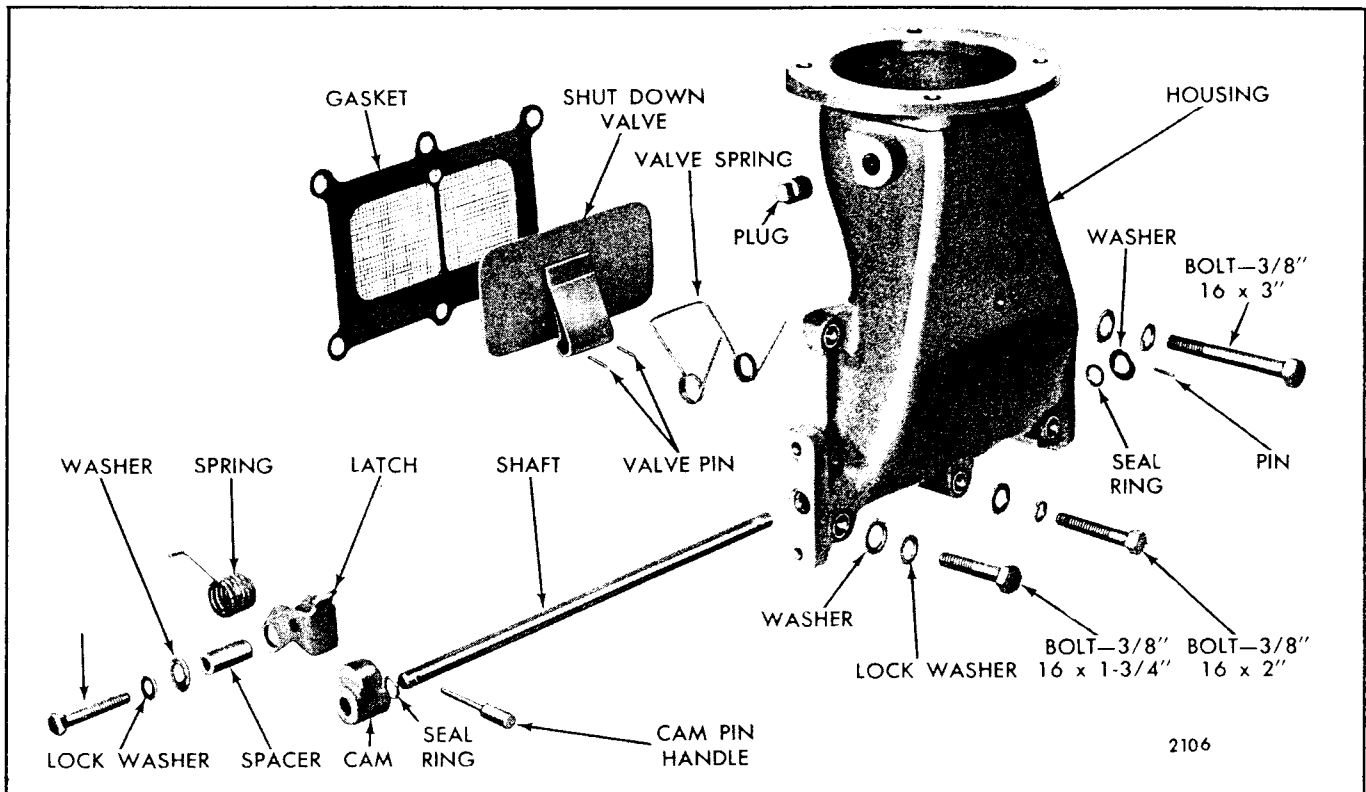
Typical In-Line Air Shut-Down Housing Details and Relative Location of Parts
